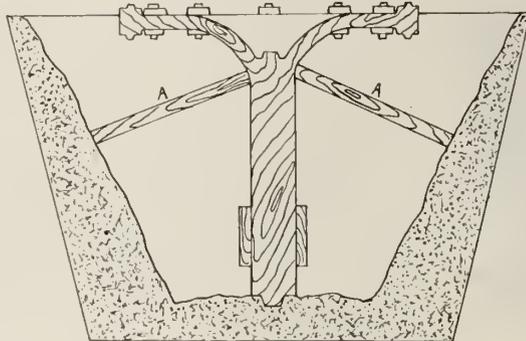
ILLUSTRATING FORMER METHOD OF MOULDING PATTERN.
